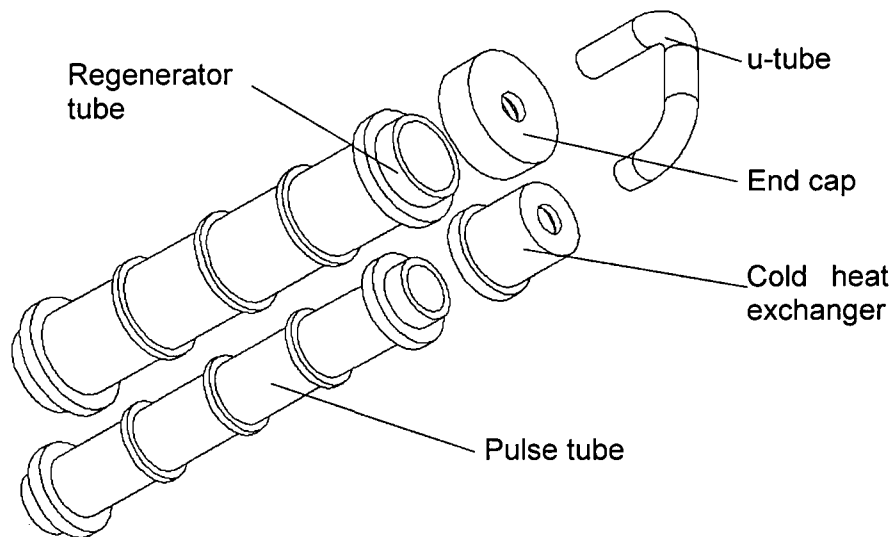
Exploded isometric view of the cold finger (pulse tube, regenerator tube and cold heat exchanger)
